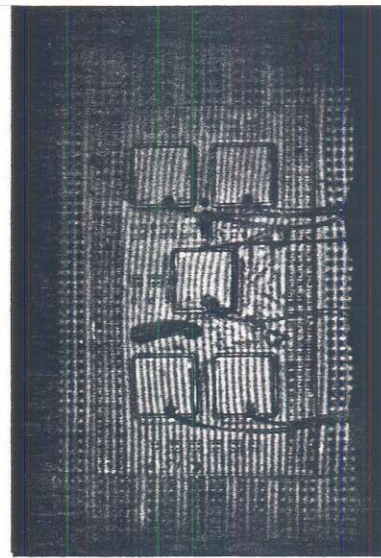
A printed wiring board showing a carrier fringe pattern modulated by the deflection field due to thermal loading.
